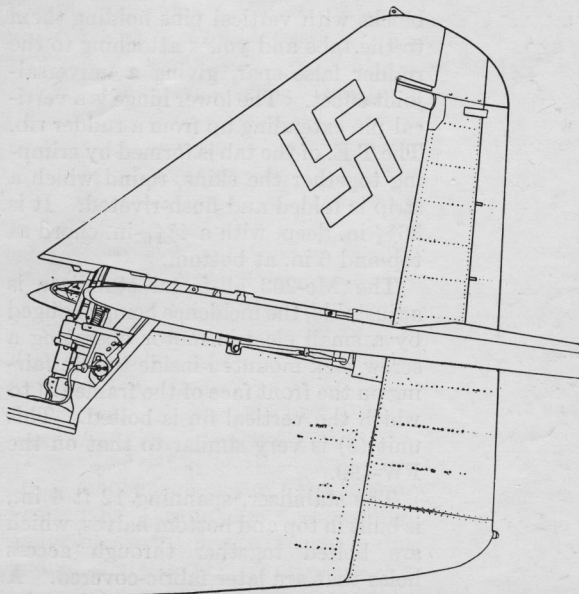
Over-all view of the empennage, showing installation of the stabilizer and its adjusting mechanism. A single-piece drawn aluminum fairing, held by 41 screws, encloses this unit.
